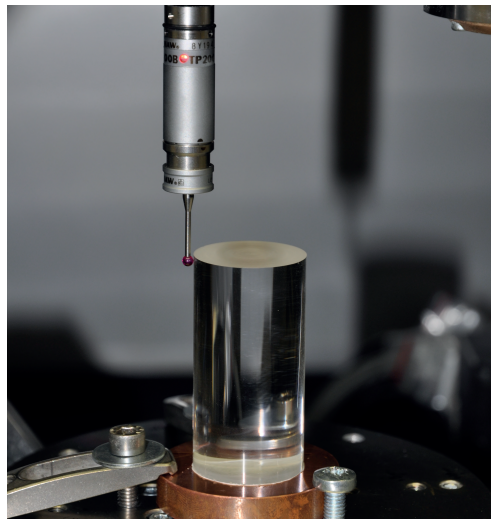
Calibration of the PMMA cylinder in the ultraprecision machining center; the cylinder is placed on top of a copper plate which serves as a reference plane; the measuring probe records the orientation and position of the cylinder's surface; Source: S. Stoebenau, TU Ilmenau
